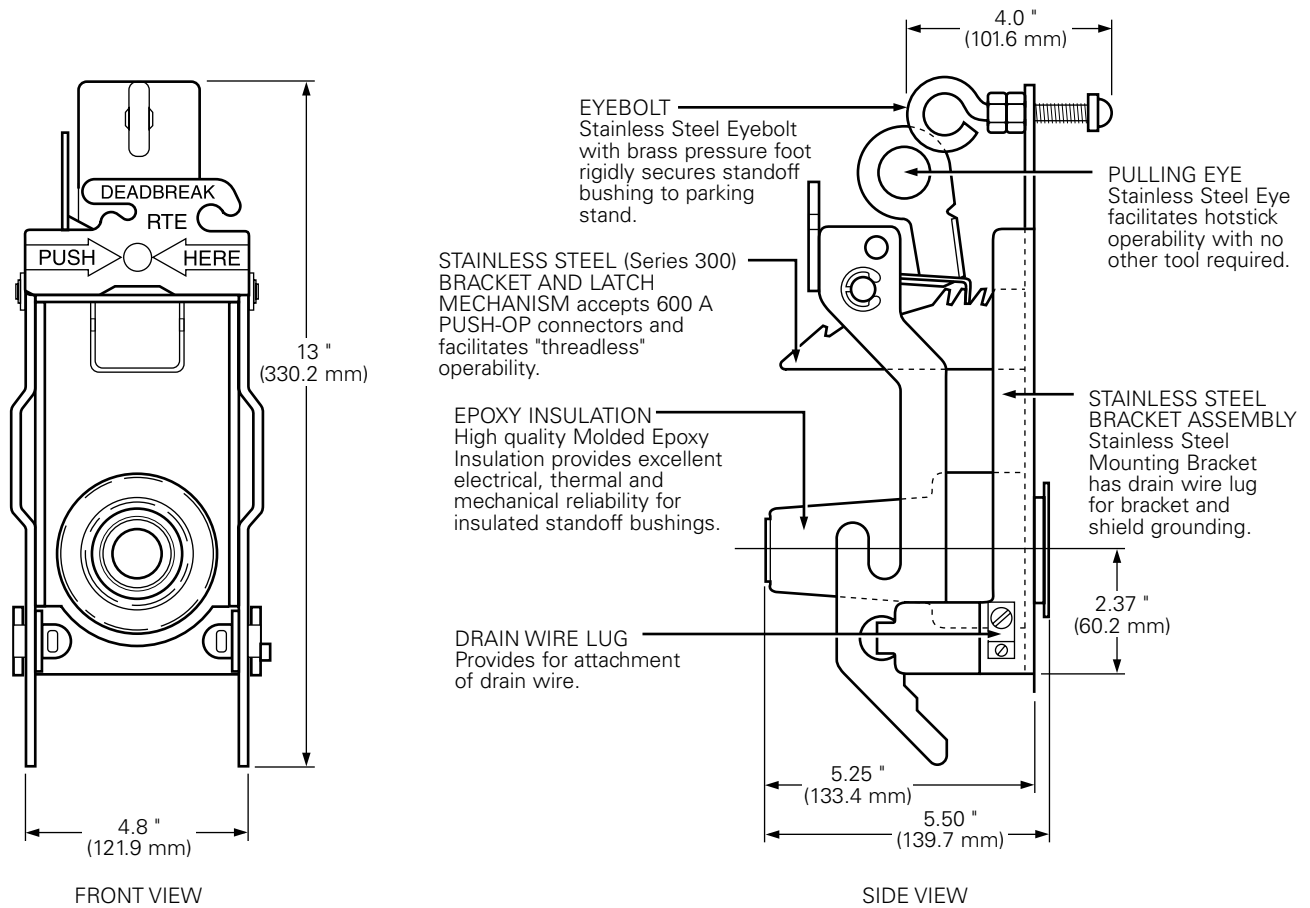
Front view shows standoff bushing and latch mechanism. Side view shows standoff bushing and latch mechanism with bracket assembly.
